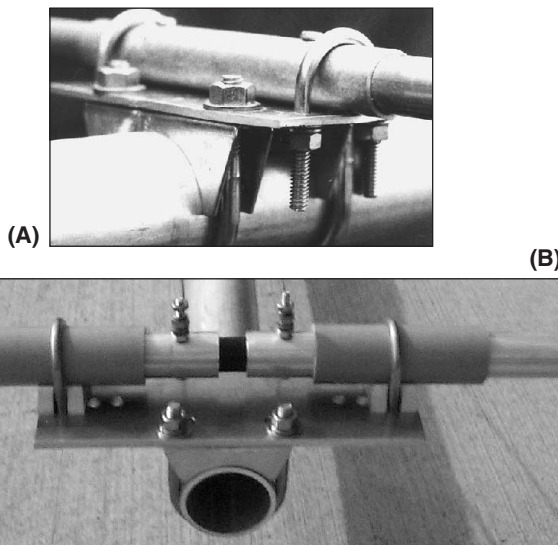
Typical construction techniques for an HF Yagi. Photo A shows a typical element-to-boom clamp. U-bolts are used to hold the element to the plate and muffer clamps hold the plate to the boom. Photo B shows a hairpin match on a driven element insulated from a mounting plate that is attached to the boom with muffer clamps and saddles. Outdoor-rated gray PVC conduit sleeves insulate the element from the mounting plate. U-bolts hold the element on the plate. The feed line is connected to the two screws to which the hairpin inductor is attached. Note that the hairpin inductor's center point is attached to the boom at an electrically neutral point. All mounting hardware should be galvanized or stainless steel. The latter requires the use of an anti-seize compound to prevent thread galling.
